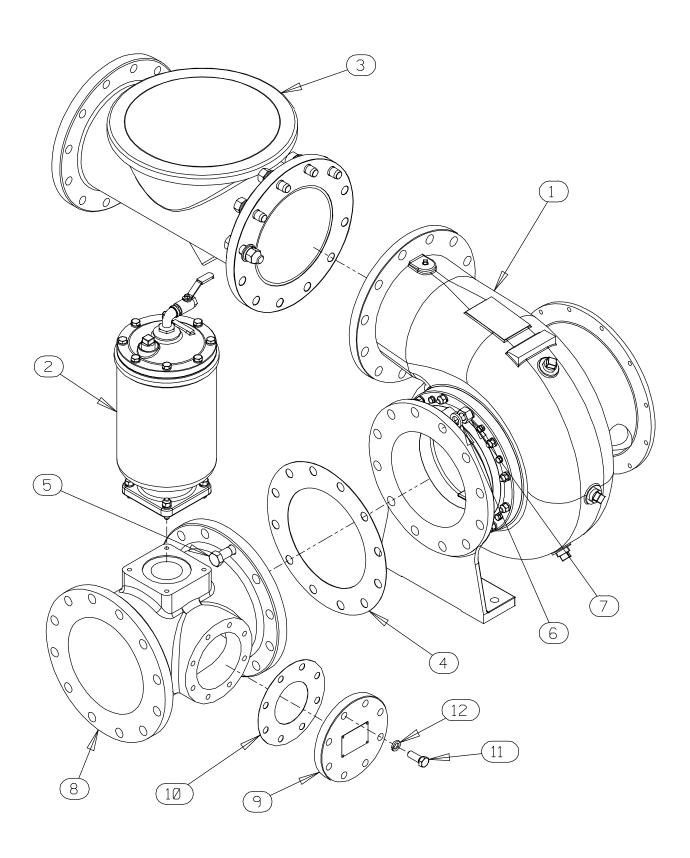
PA10A60-(SAE 3/11.5) Pump Assembly
